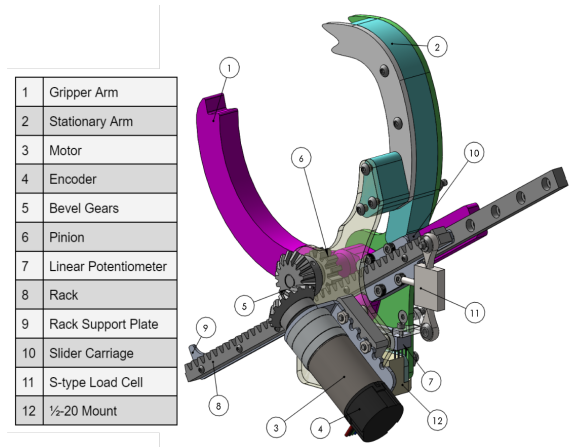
Detailed CAD view of the prehensor and variable transmission components. The design is made up of three primary elements, the stationary arm, gripper arm, and variable lever arm assembly. Components are further described in sec II.
